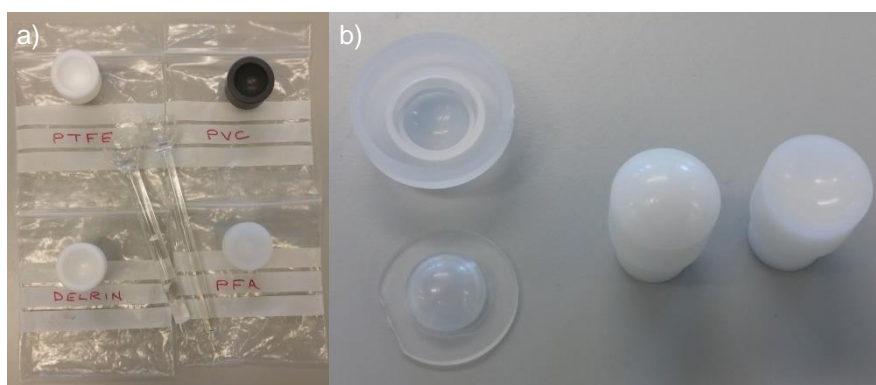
a) Spin cast moulds, b) male/female moulds.
